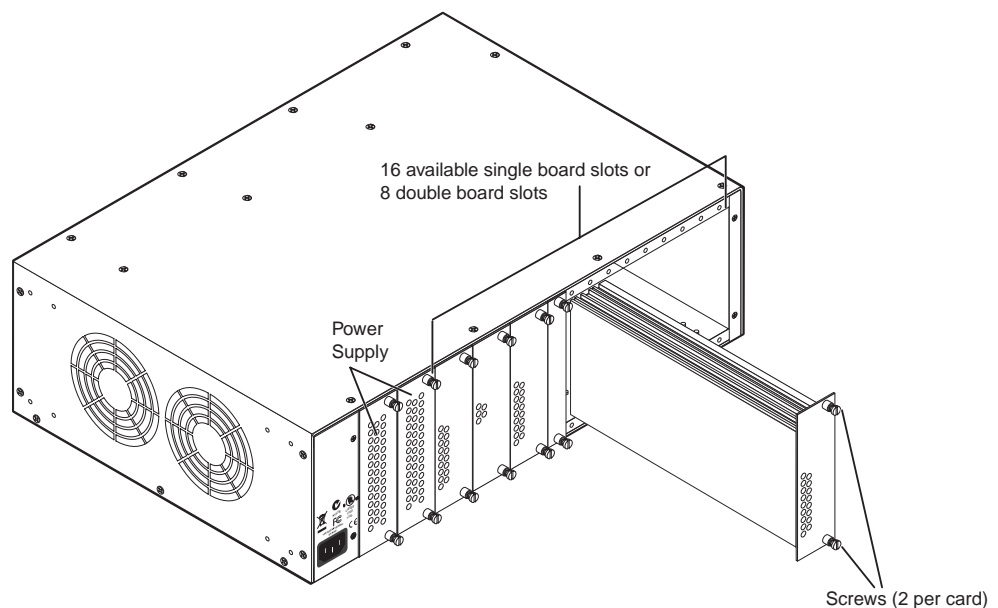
Inserting Boards into the PowerCage 1600 Enclosure
